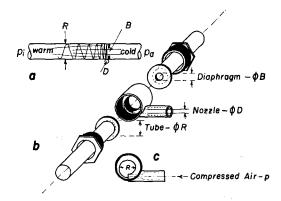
Vortex tube; (a) schematic sketch; (b) tube taken apart (thread surfaces black); (c) central piece with nozzle.
